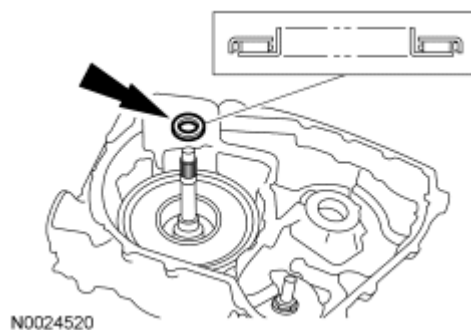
No. 4 Turbine Shaft Thrust Bearing
